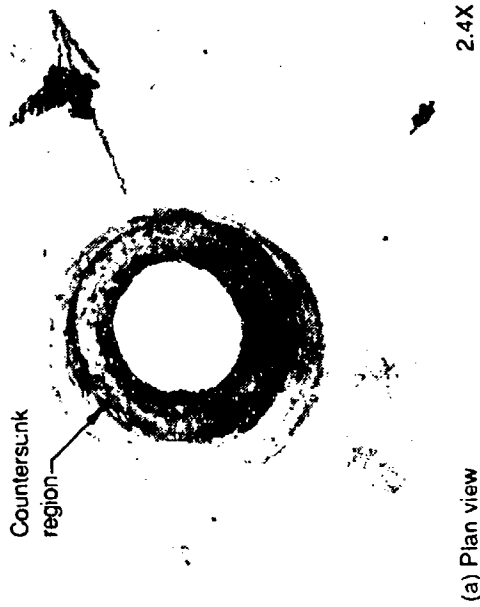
Damage in Fastener Hole Loaded Under Shear
